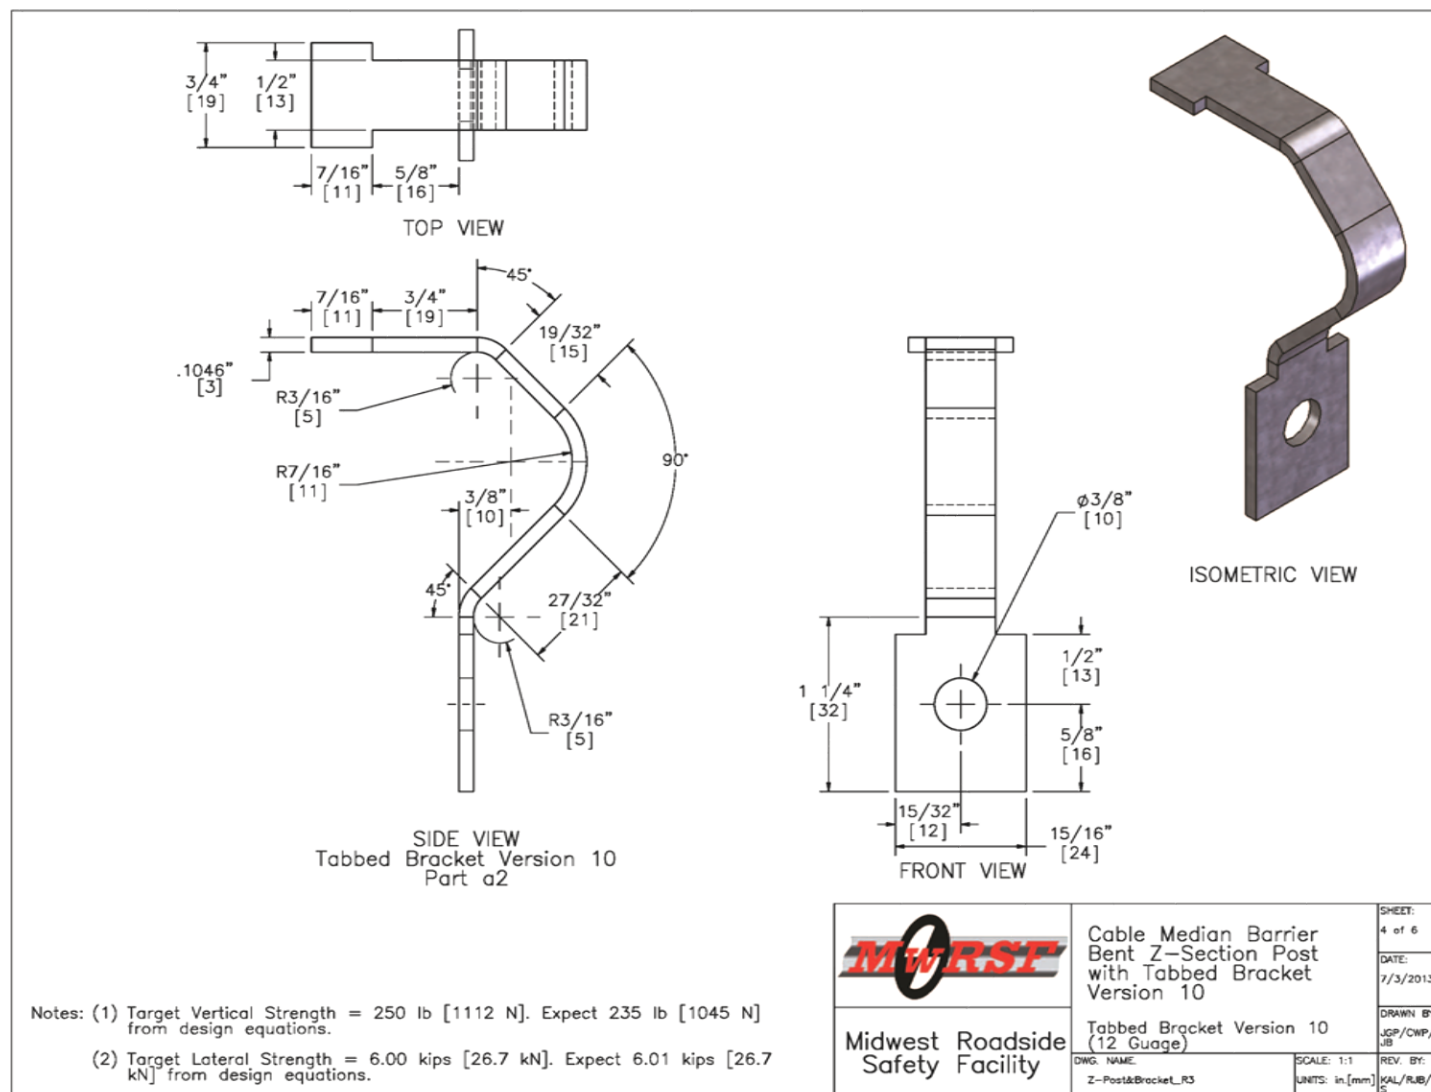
Midwest Weak Post Details, Test No. CPZ-3
